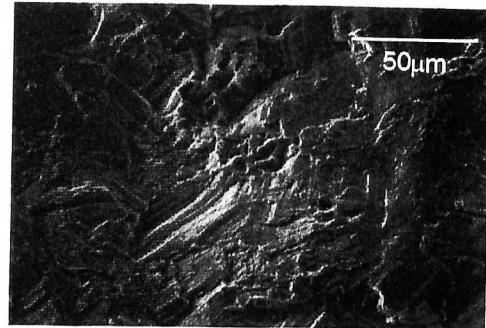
ALFSOTATS RS-W+6000h, 90°C fracture surface
